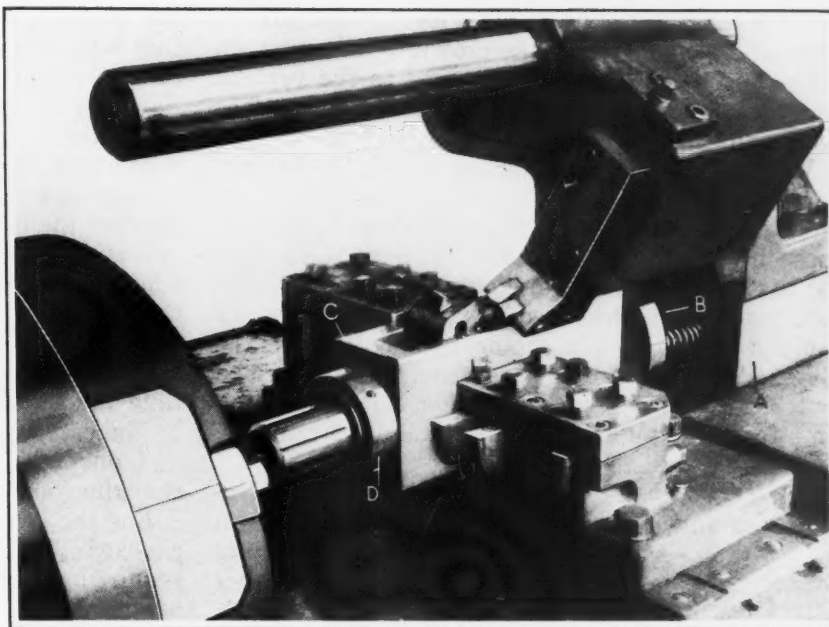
Close-up View of Set-up Shown in Fig. 3
